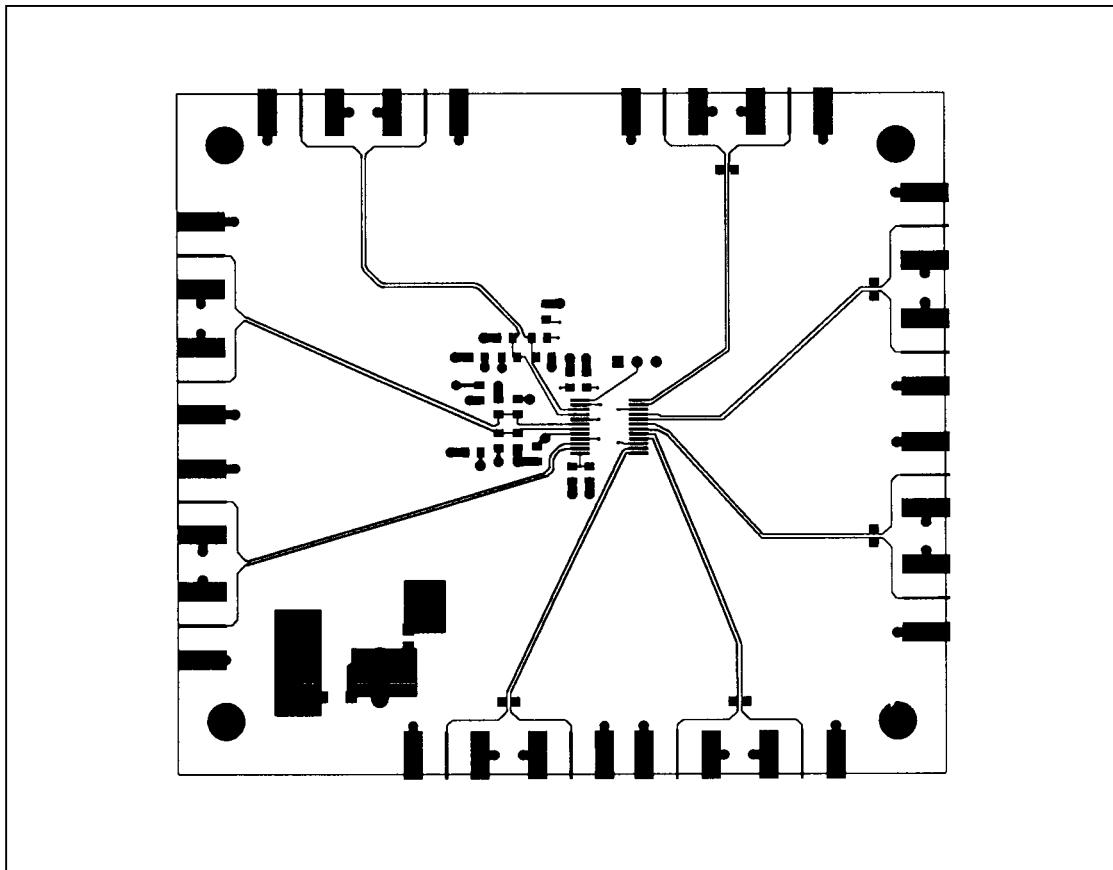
MAX3681 EV Kit PC Board Layout—Component Side
